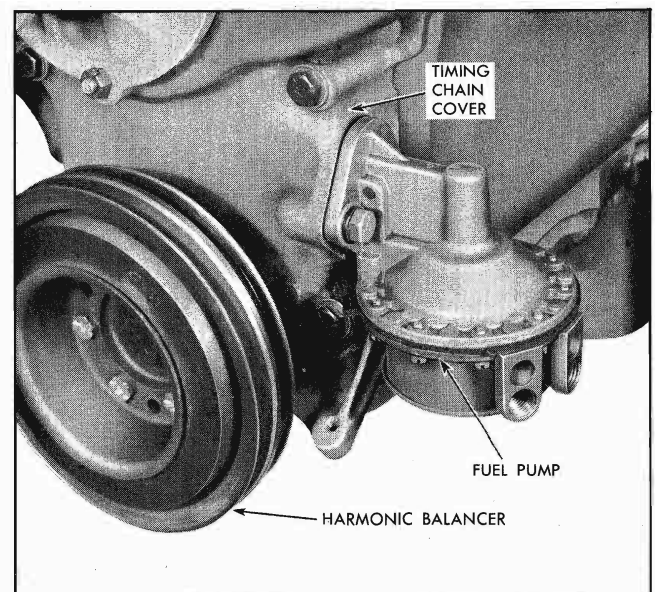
Position of Fuel Pump on Timing Chain Cover
